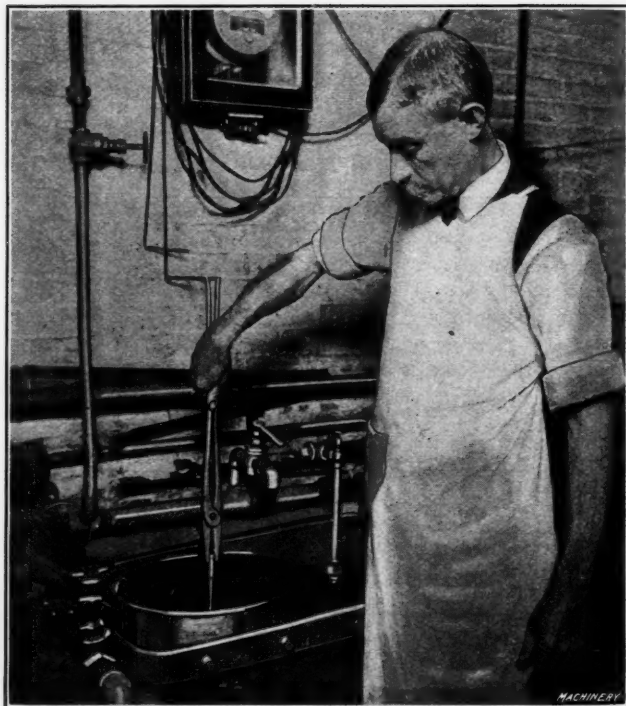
Hardening a Redrawing Punch—Note Method of Dipping
